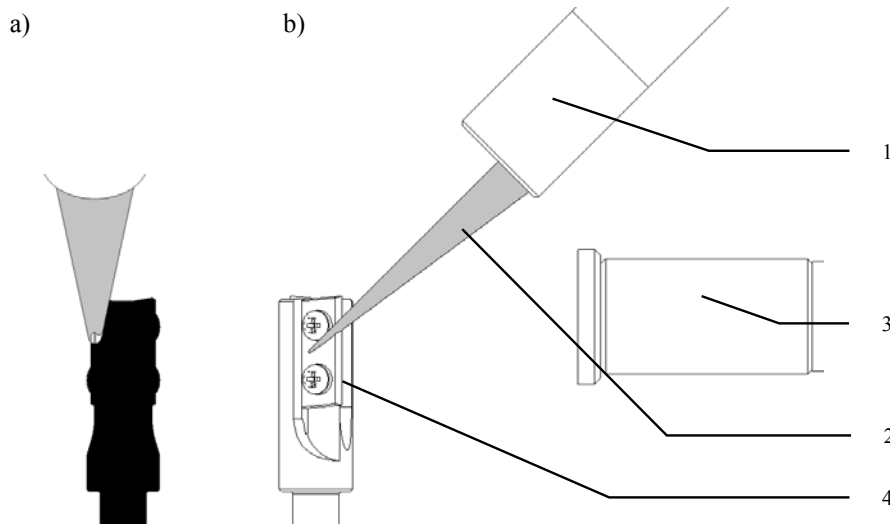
Shadow line sectioning (triangulation) technique: a) the camera point of view: light-shadow border projected on the tool illuminates tool tip (white) and discovers the shape of the cutting edge section b) side view of projector-camera-tool setup. 1) LED projector with lenses, 2) light beam, 3) camera with lenses, 4) inspected tool
